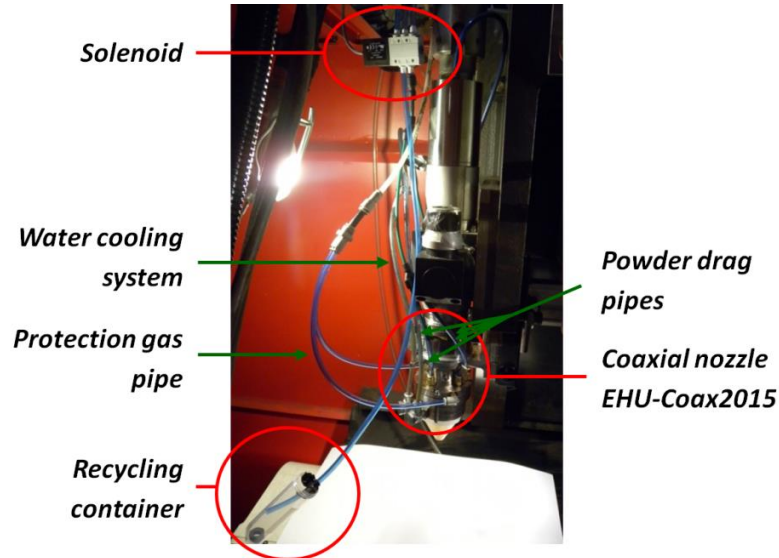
Experimental setup of the solenoid inside the LMD machine.
